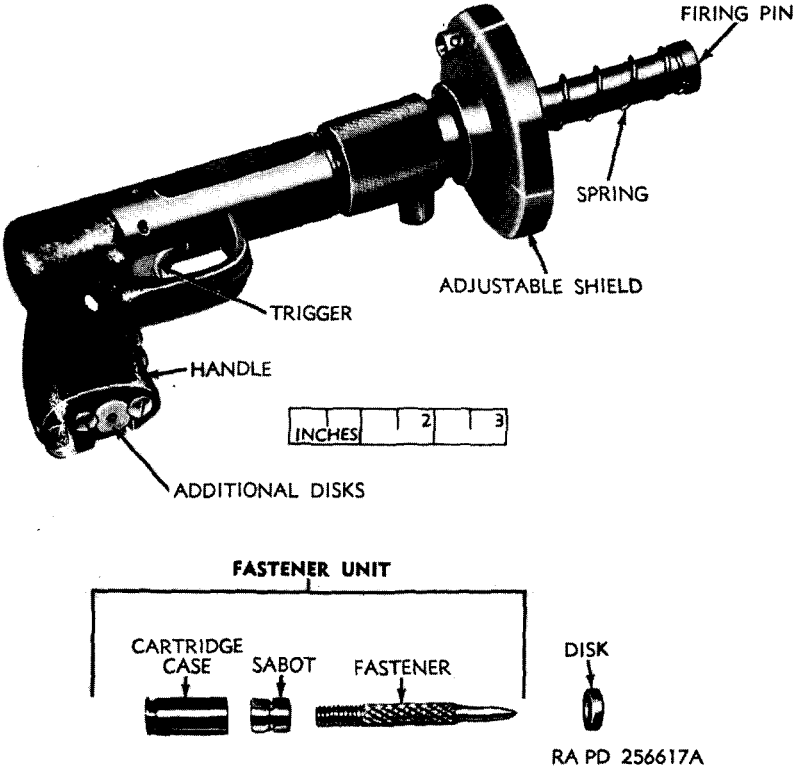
Magazine-type powder-actuated projectile unit driver and fastener unit.
